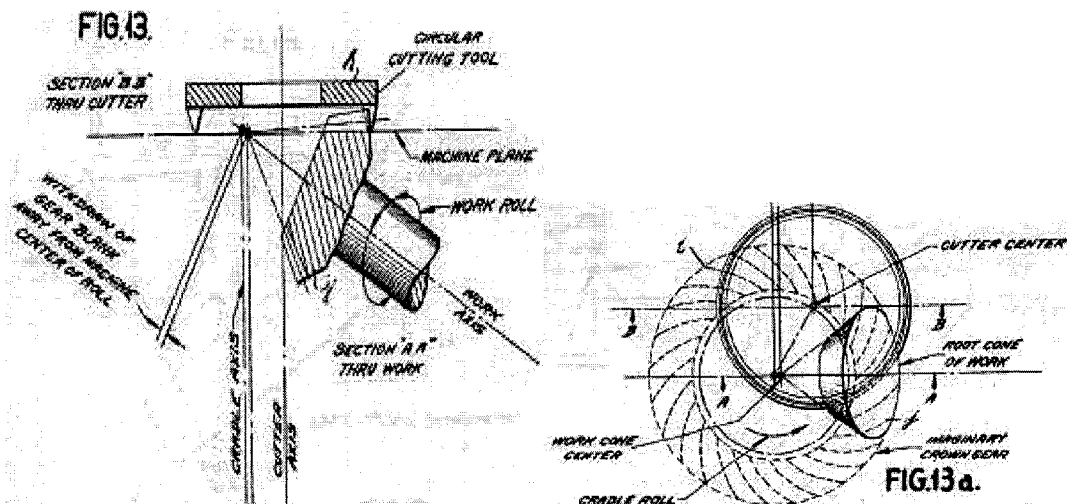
An improved method of generating the teeth of spiral bevel gears and hypoid gears using a circular cutter [Soper, 1950]
